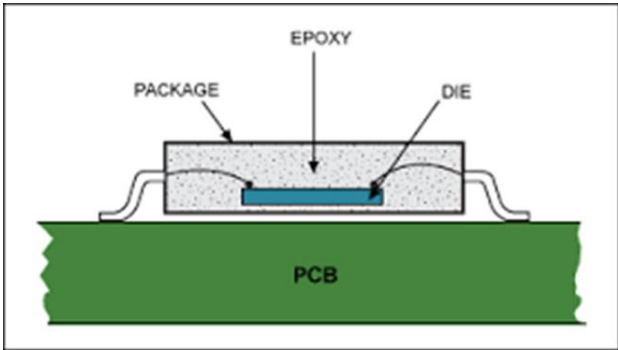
Silicon die mounted on PCB (source: [6])
